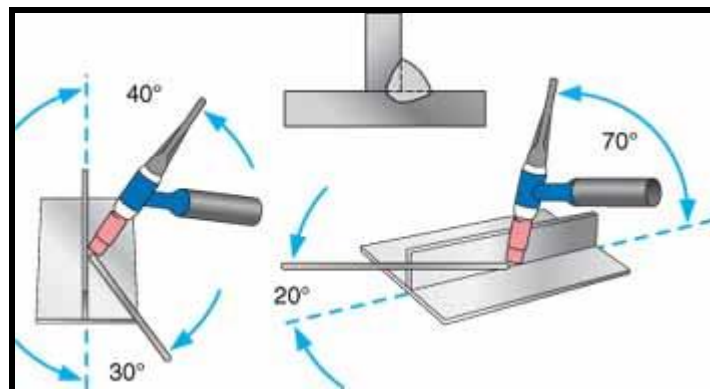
Schematic representation of T-joint welding technique in manual GTAW process.
